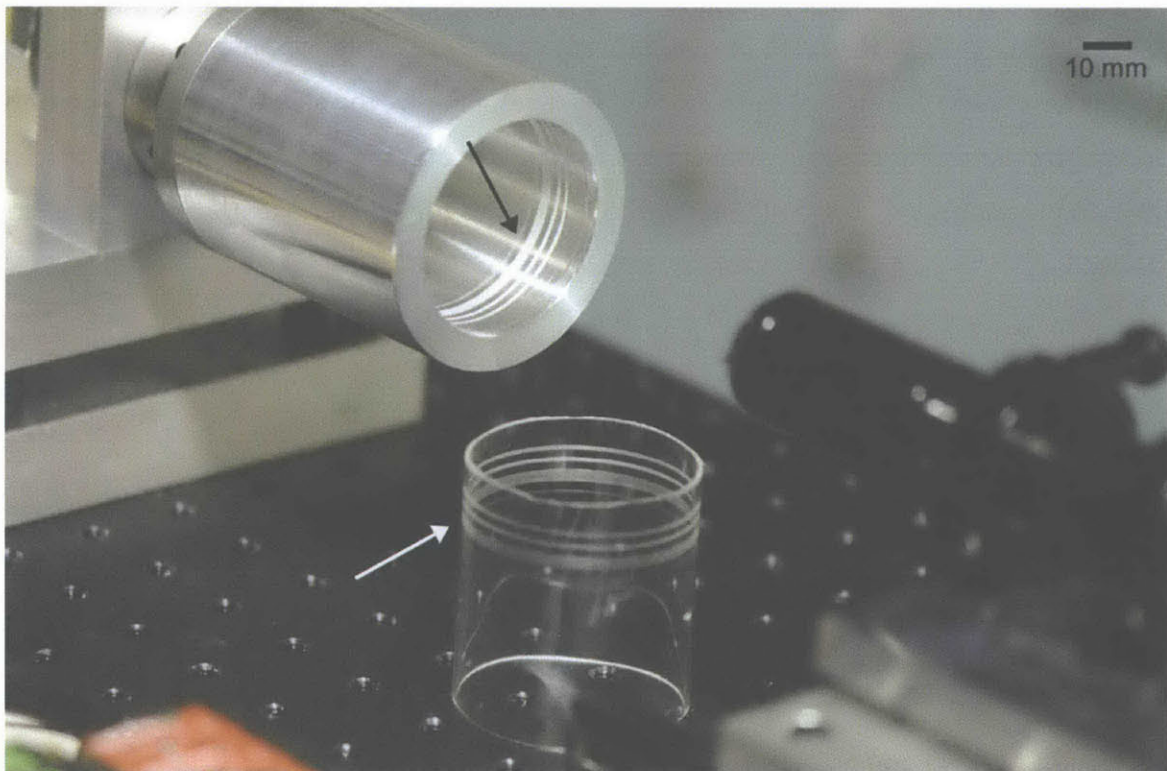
The centrifugal casting machine designed by Petrzelka, and a cylindrically cast stamp [19]. This machine uses a laser to pattern a thin layer of photoresist on the inside of a rotating drum. PDMS resin is then poured into the spinning drum, and the centrifugal force causes the resin to evenly spread throughout the interior surface of the drum. Once the resin is cured, the cylinder is stopped and the stamp is removed. Note the seamless nature of this stamp, and the ability it affords for continuous printing.
